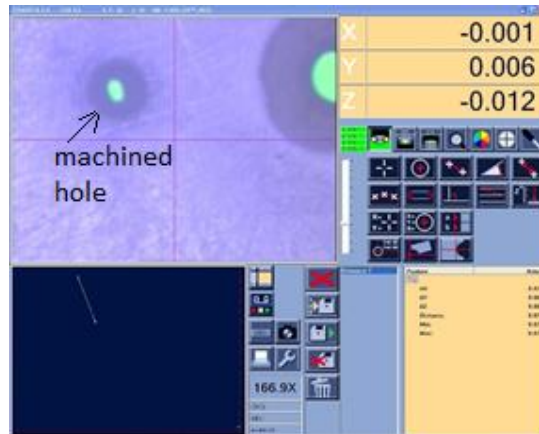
Micro hole on stainless steel (1.01 mm thickness), Tungsten tool electrode, OCP=1A
